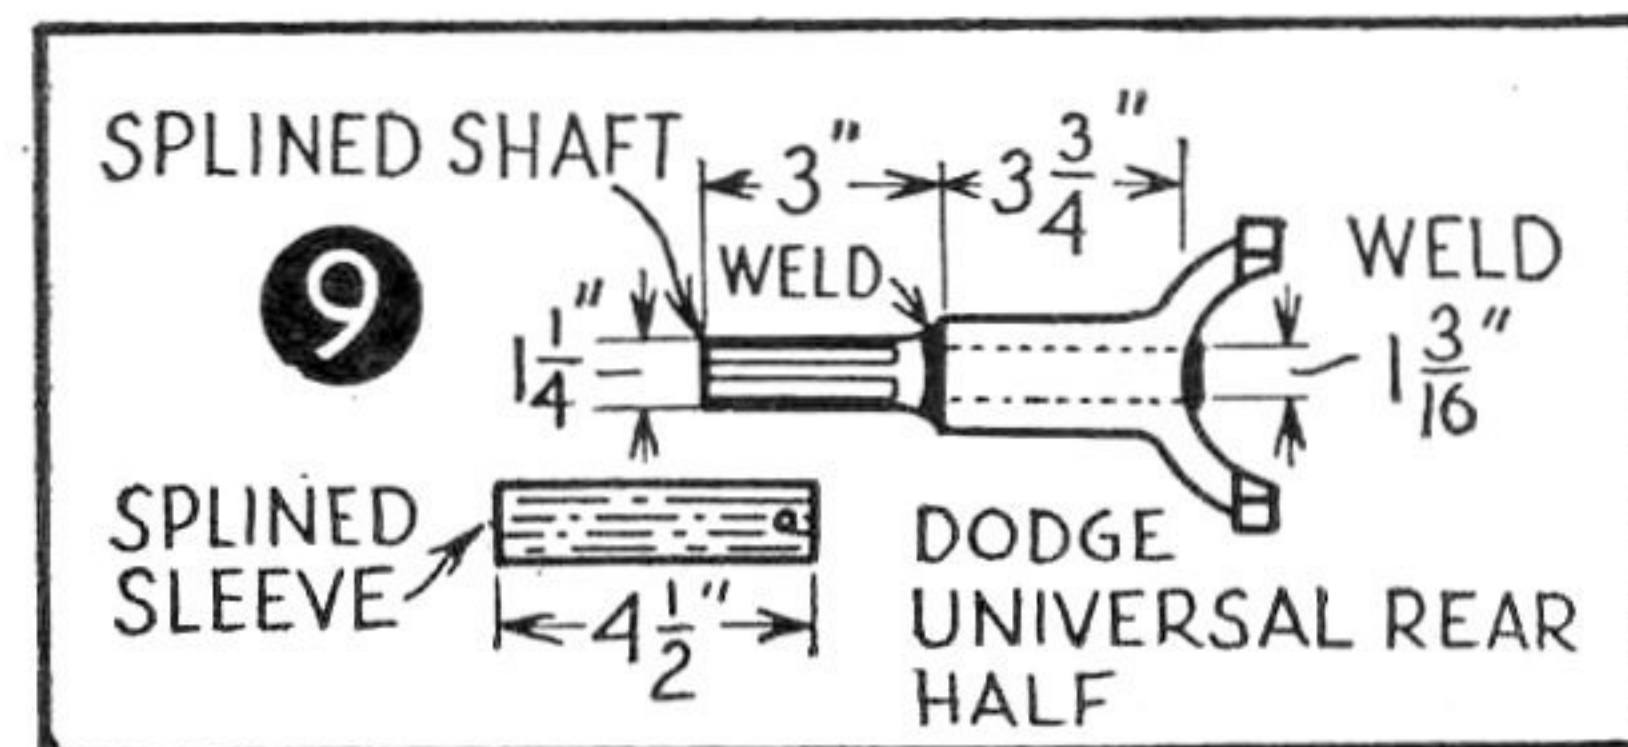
Details of short drive shaft rebuilt from old Dodge universal joint and end of model "T" drive shaft.
